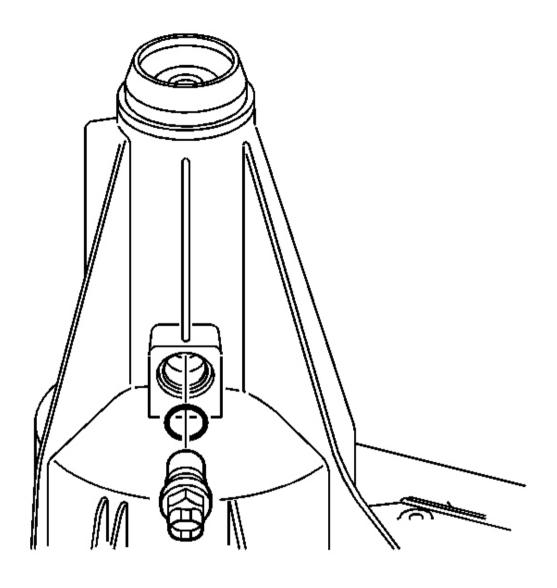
Speed Sensor & O-Ring Courtesy of GENERAL MOTORS CORP.
